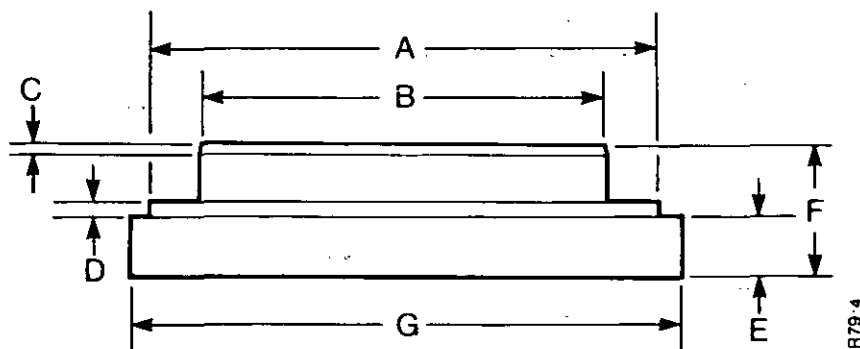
TOOL FOR INSTALLING HUB OIL SEAL
